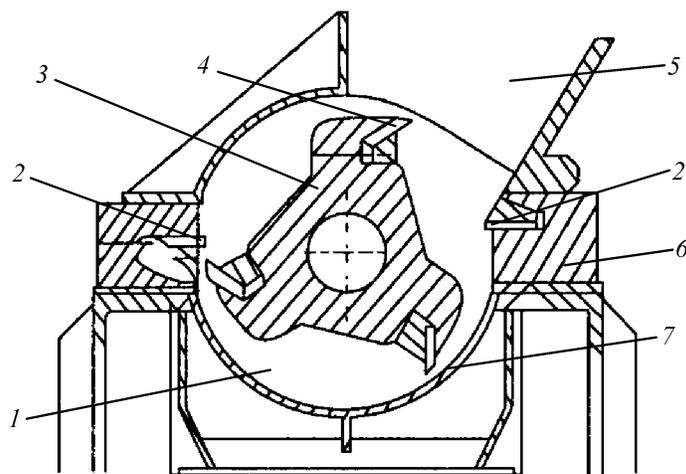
Horizontal cutting mill: (1) the crushing chamber; (2) blades of stator; (3) the rotor; (4) blades of the rotor; (5) the feeding hole; (6) the body; (7) the sorting sieve.
